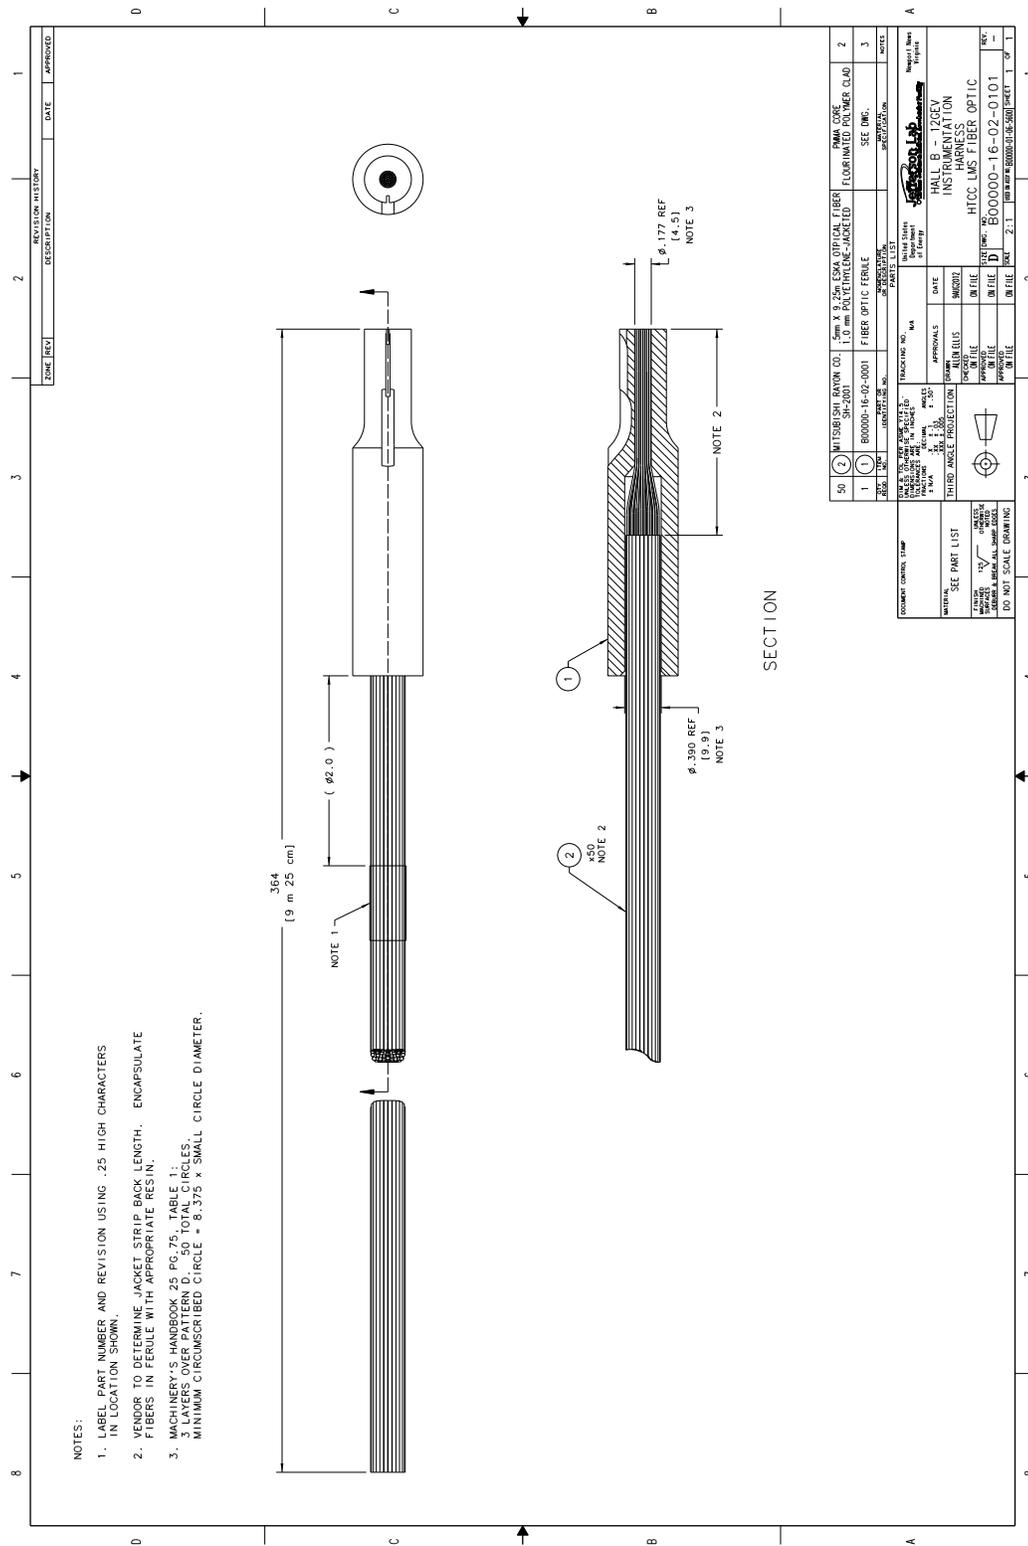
Fiber bundle assembly for the HTCC LMS. Ref. Drawing B00000-16-02-0101.
